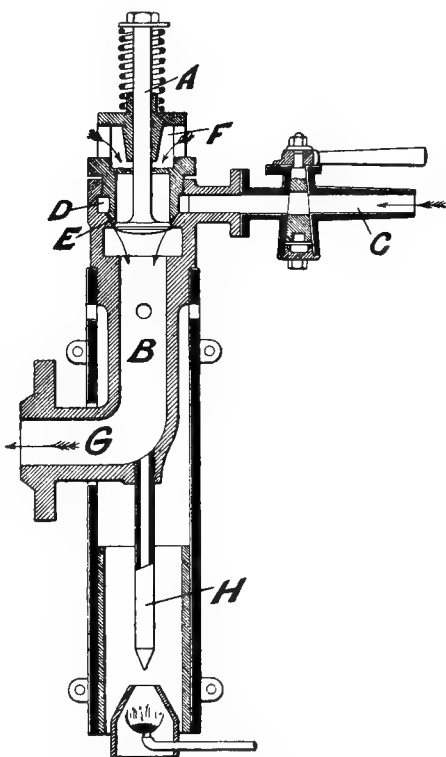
Campbell Oil Engine (section through vaporiser and igniter)
